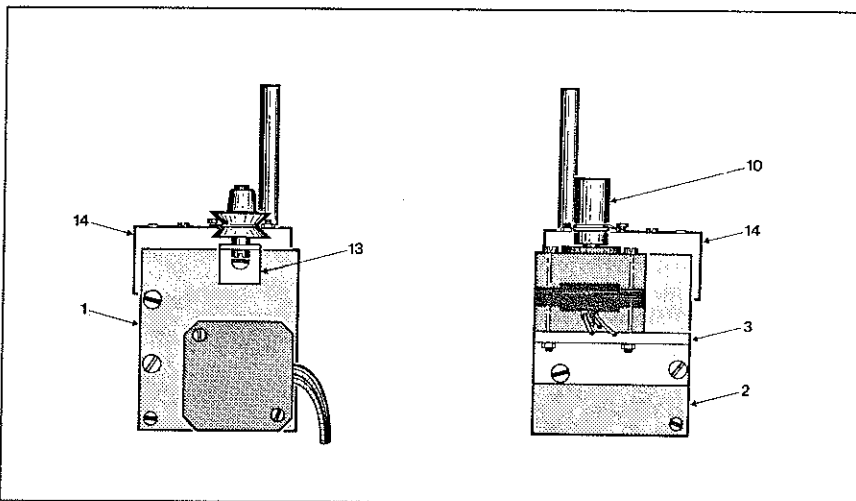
Parts identification for the side plates which hold the stepper motors.
